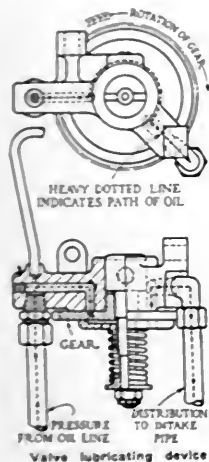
LUBRICATING DEVICE OF THE BOURNONVILLE ROTARY VALVE
